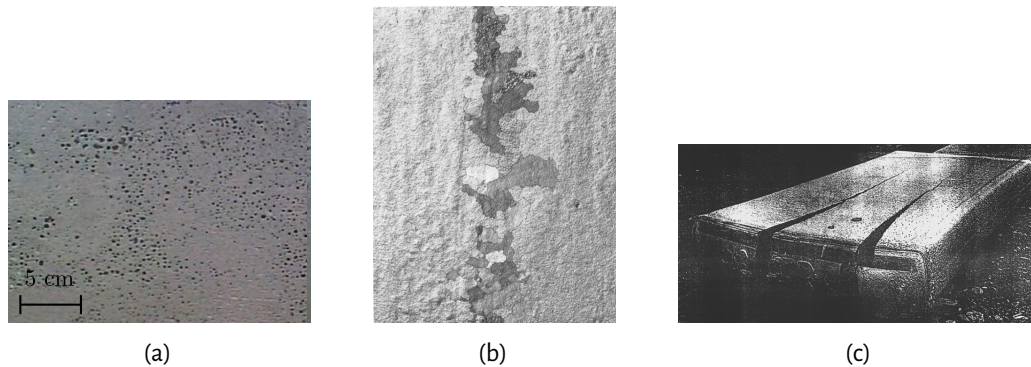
Solidification related defects found in cast product: a) surface cavities in ingot casting [51] b) freckle in the form of chain of equiaxed crystals in Ni-base superalloy investment casting [45] and c) crack during continuous casting [52]
